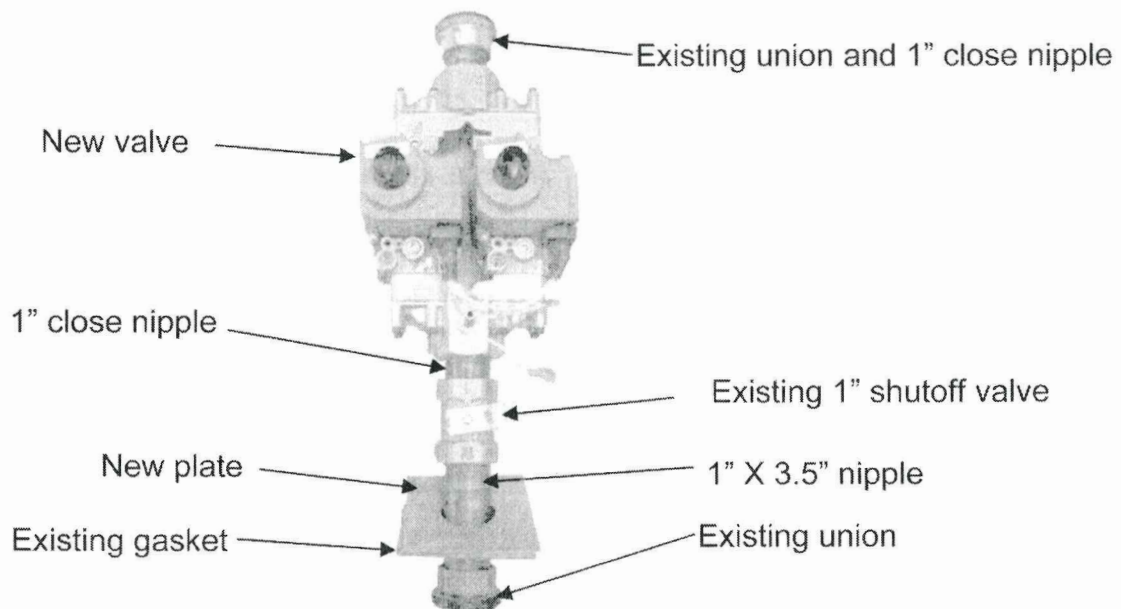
5 BURNER VALVE ASSEMBLY.
